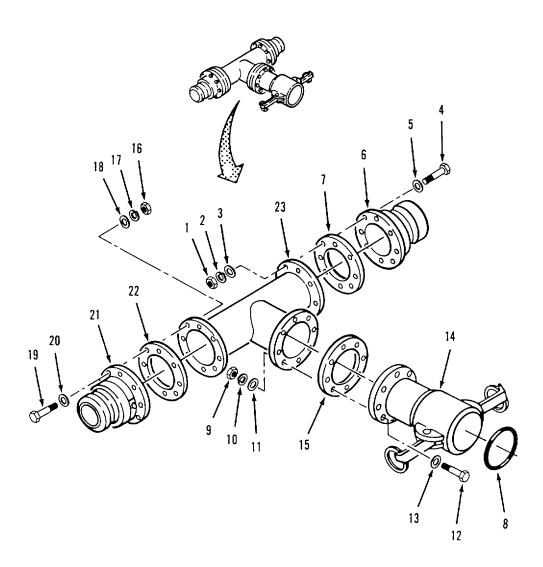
Tee Assembly (9112-Y4) Disassembly
